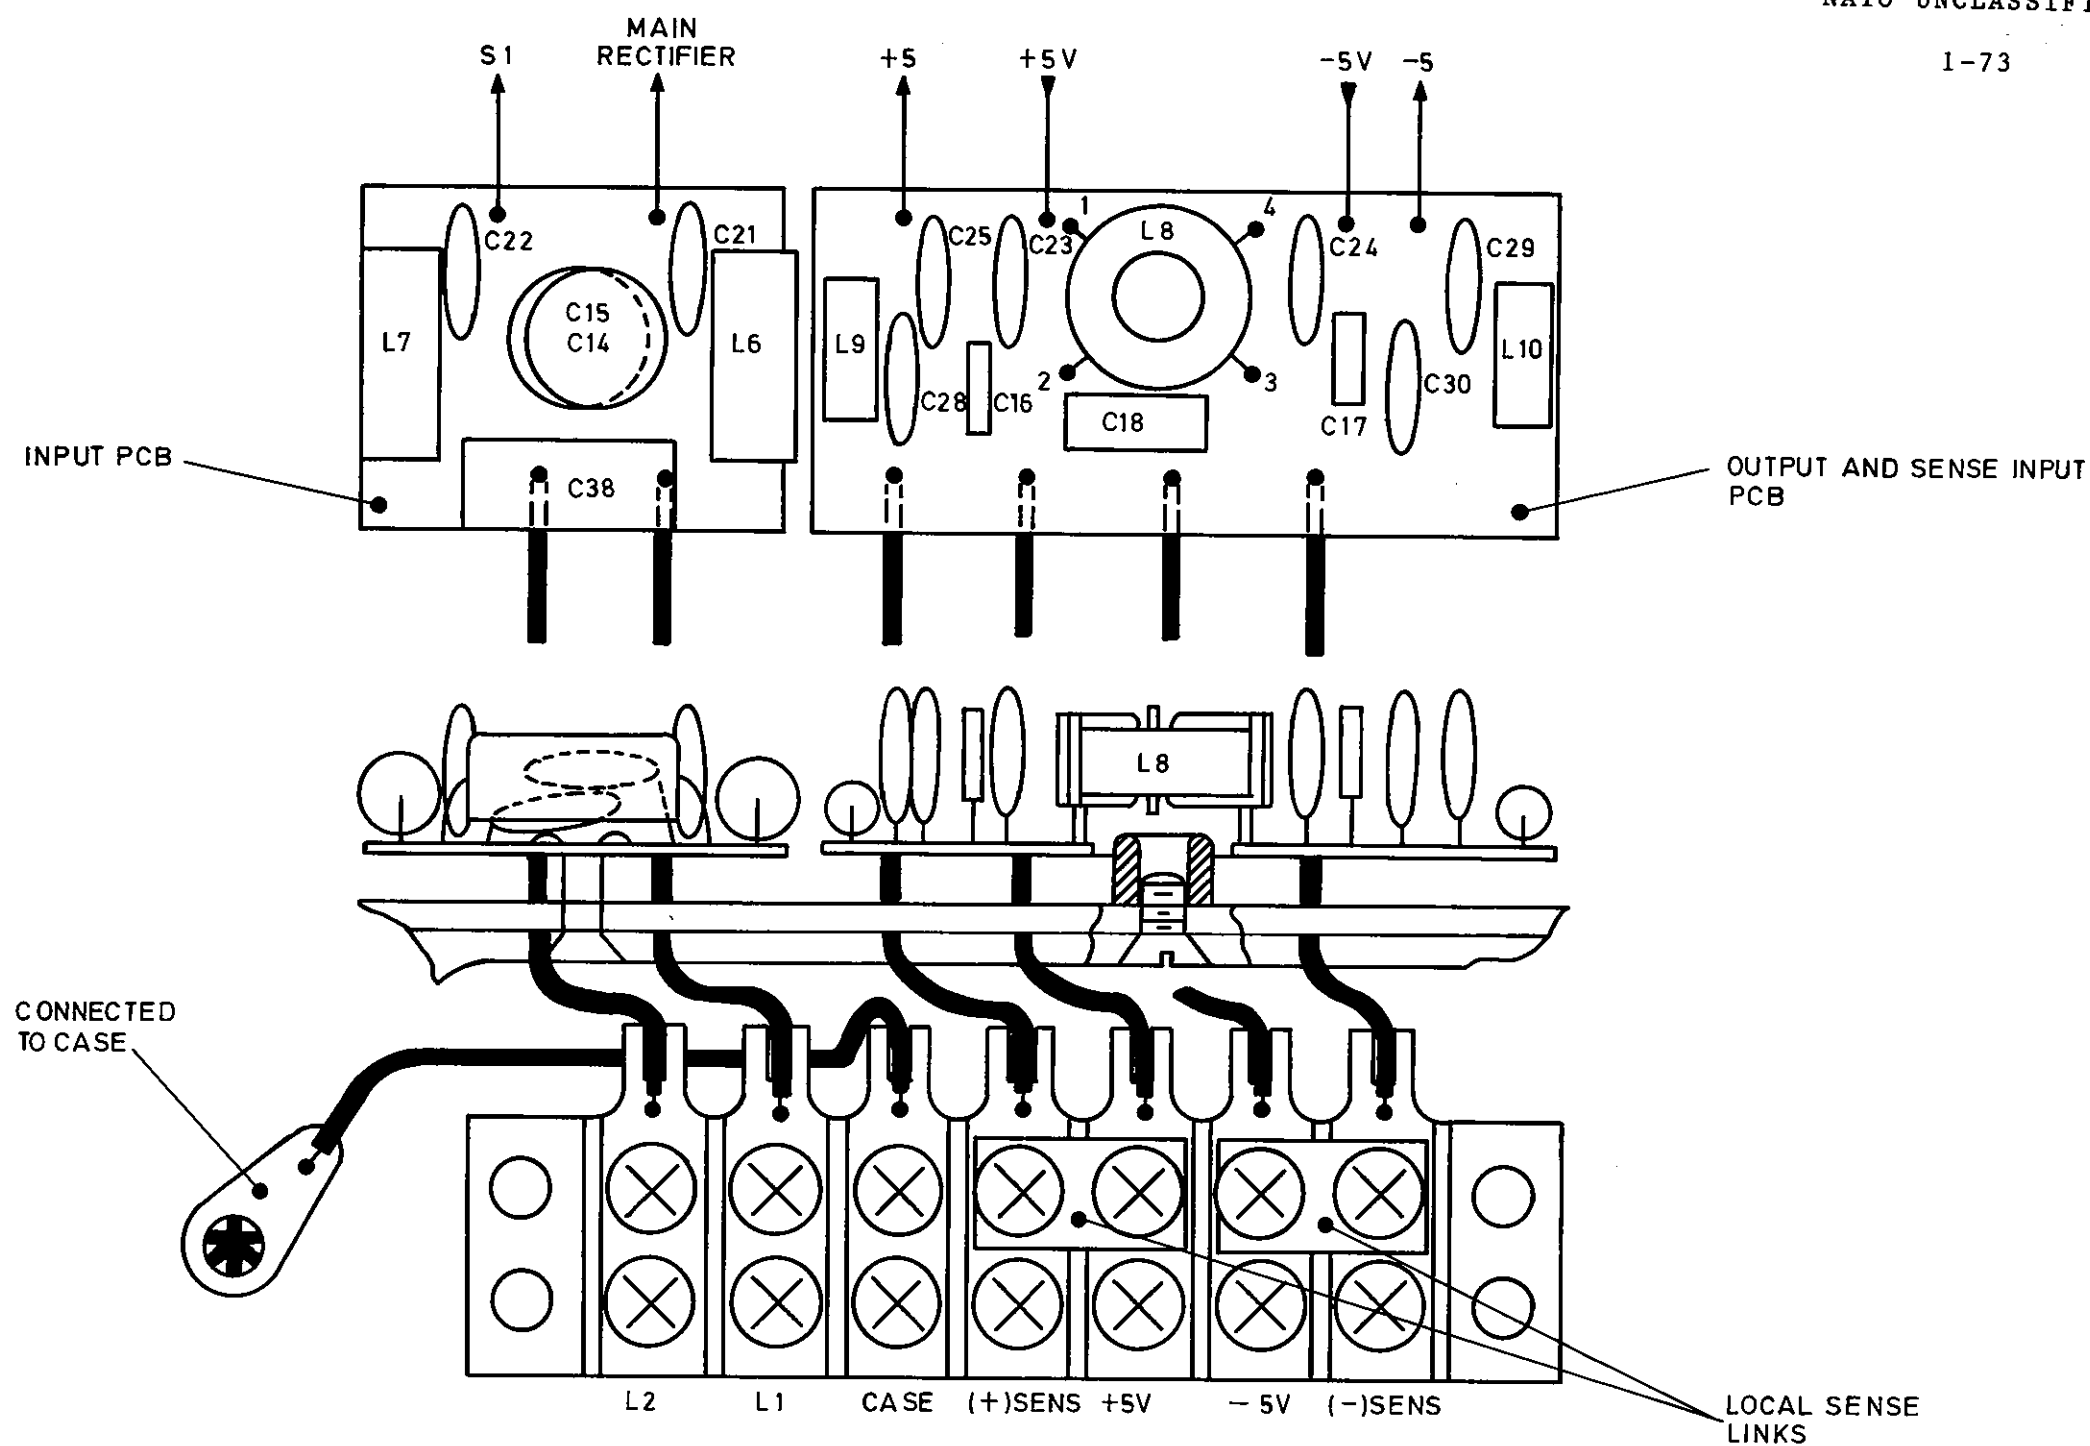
+5 Vdc Power Supply 210, Top Side Assembly and Component Location Diagram (Sheet 2)
